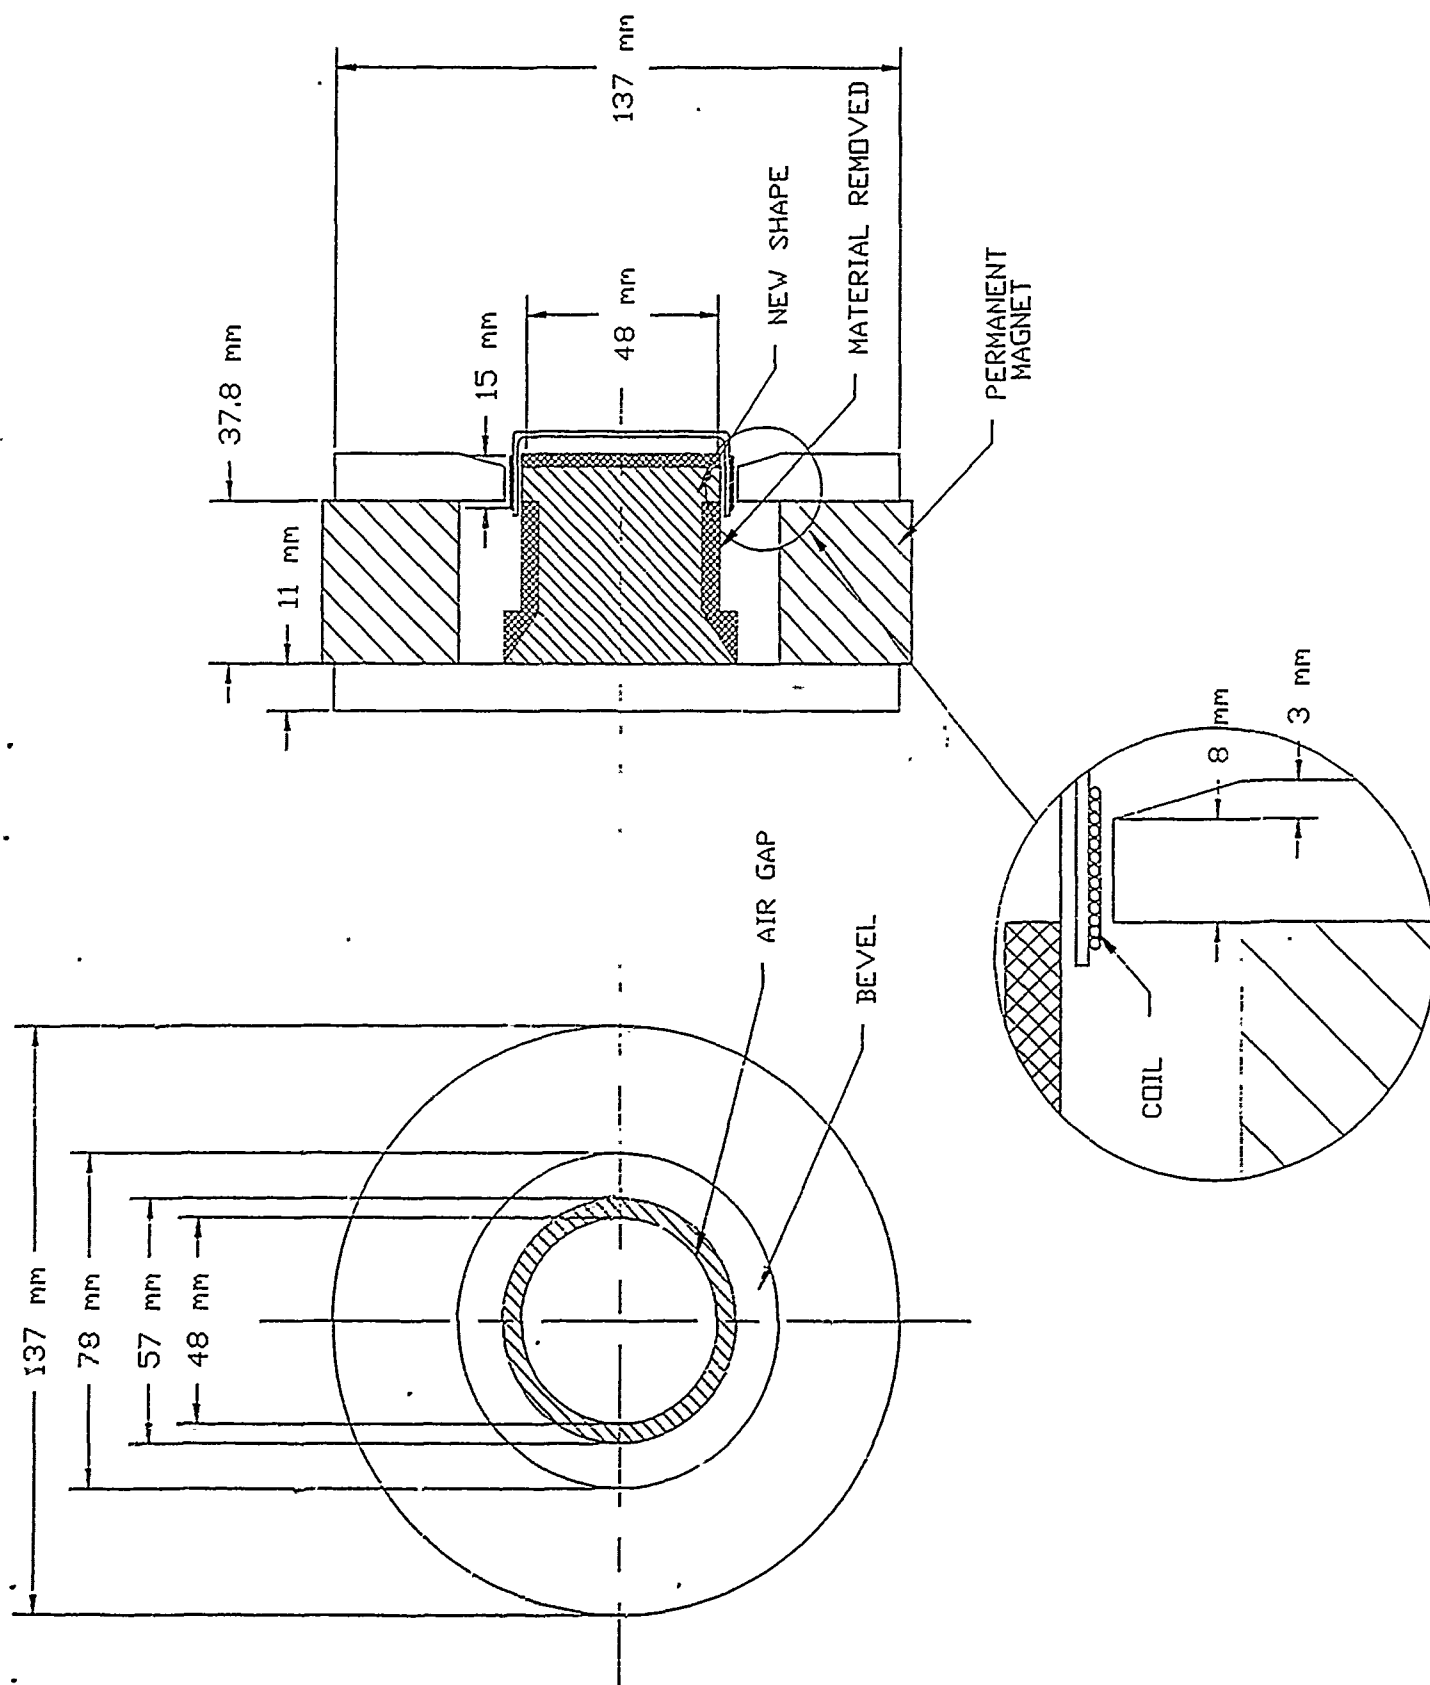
COIL MAGNET EXCITER ASSEMBLY
